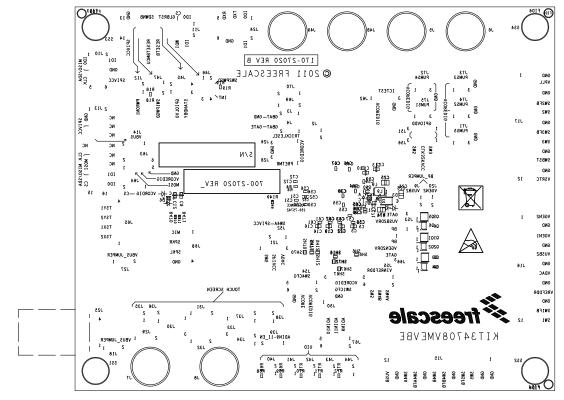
KIT34708VMEVBE (Rev. B) Inner 2 Layer Layout
